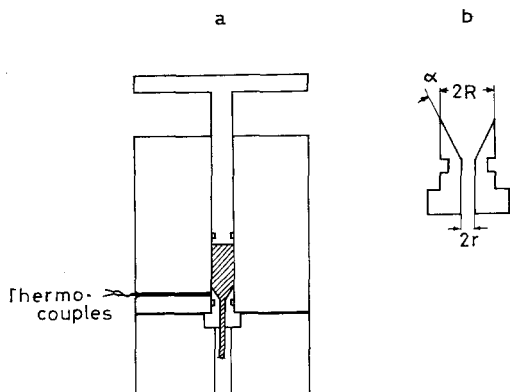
Device used for extrusion experiments (a) piston, cylinder, and die assembly (b) vertical section of die.
